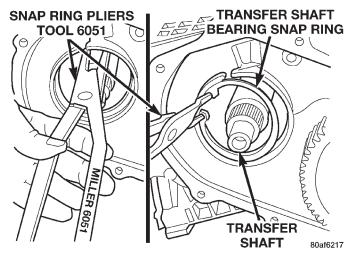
Install Transfer Shaft Bearing Snap Ring
